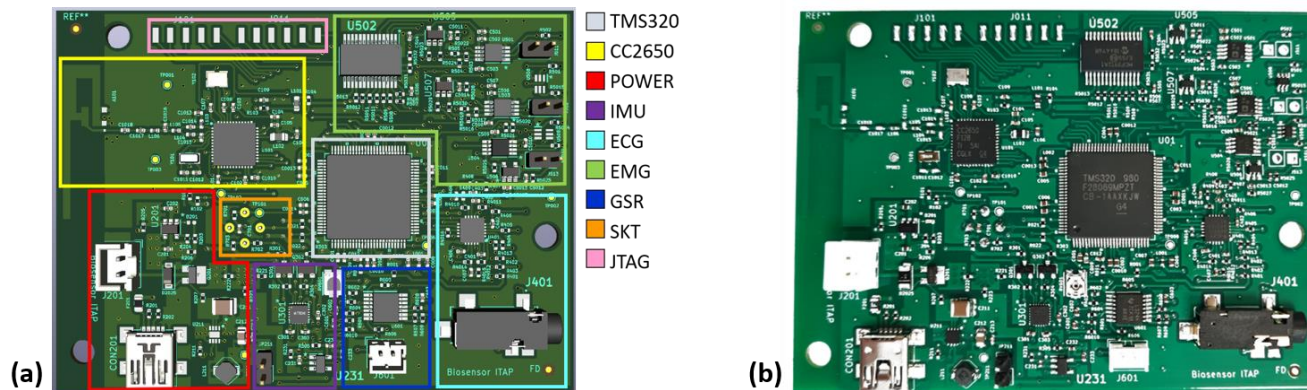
System design. (a) Layout of the components (b) Top view of the assembled PCB.
